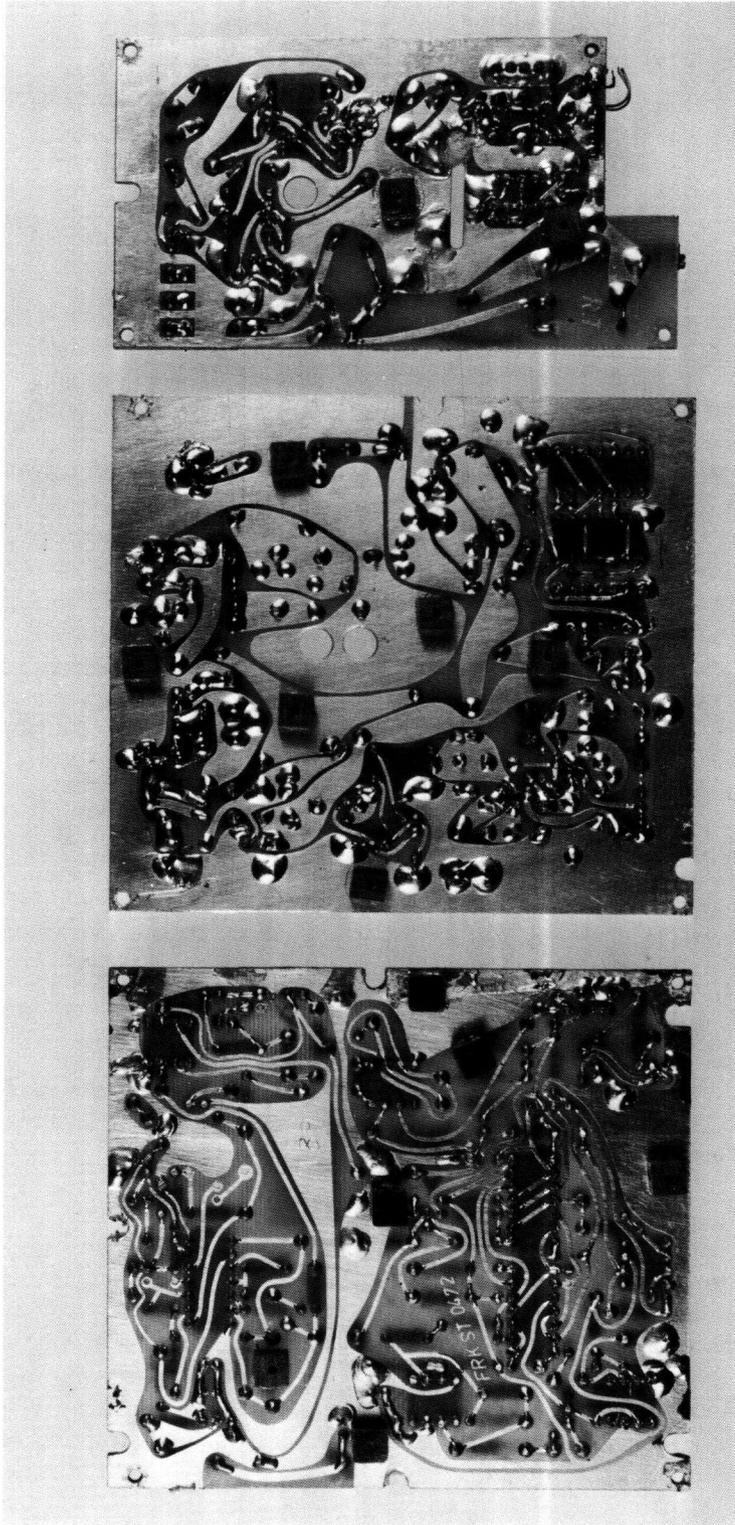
Printed-circuit boards with blocks, for rubidium unit
